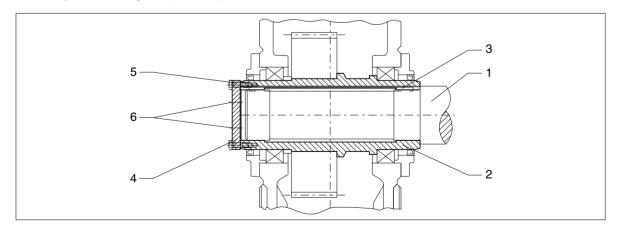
Hollow shaft with parallel keyway, demounting with end plate
